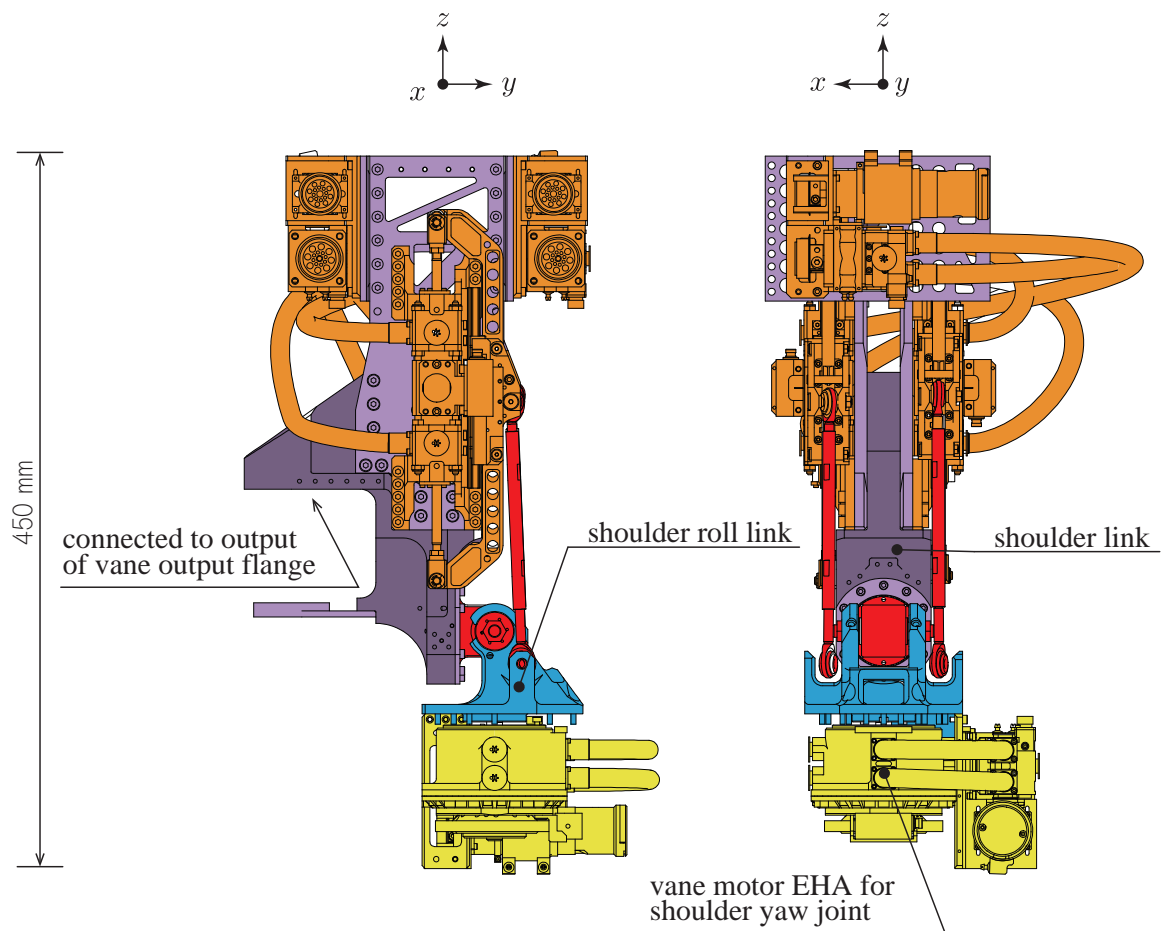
CAD model of the left shoulder link. Structure of shoulder link is shown in purple. The shoulder link is fixed on the output flange of the additional joint, which is not shown in this figure. Orange colored linear EHAs drive blue intermediate shoulder roll link. The link rotates around the red colored universal joint to pitch/roll direction. Yellow colored vane motor drives yaw direction of shoulder.
